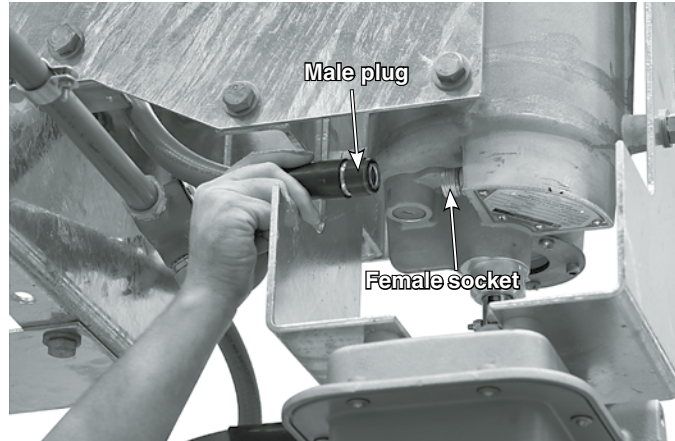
Optional quick-connect control cable. Male plug is keyed into female socket.
